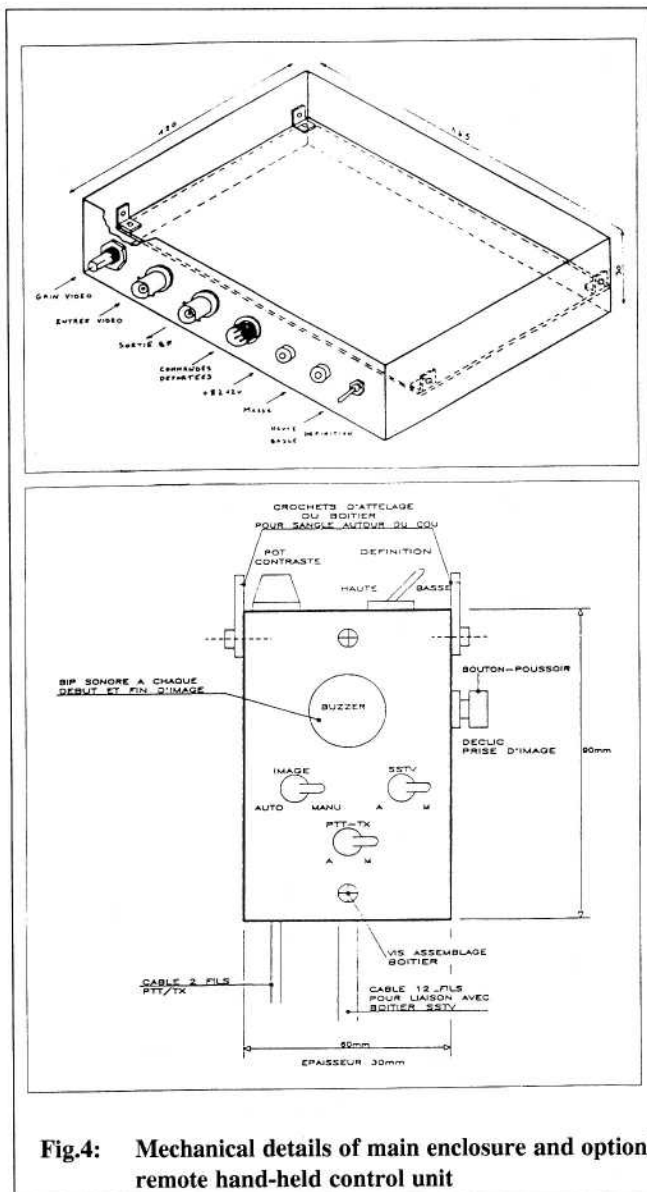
Mechanical details of main enclosure and optional remote hand-held control unit
